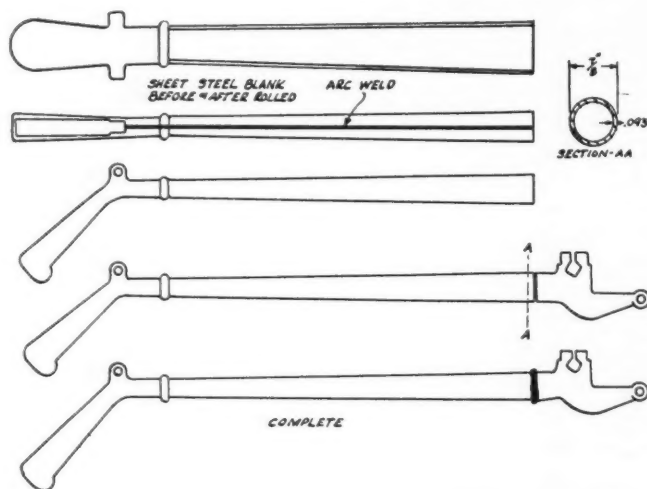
The hand brake lever, built up from sheet metal by welding
